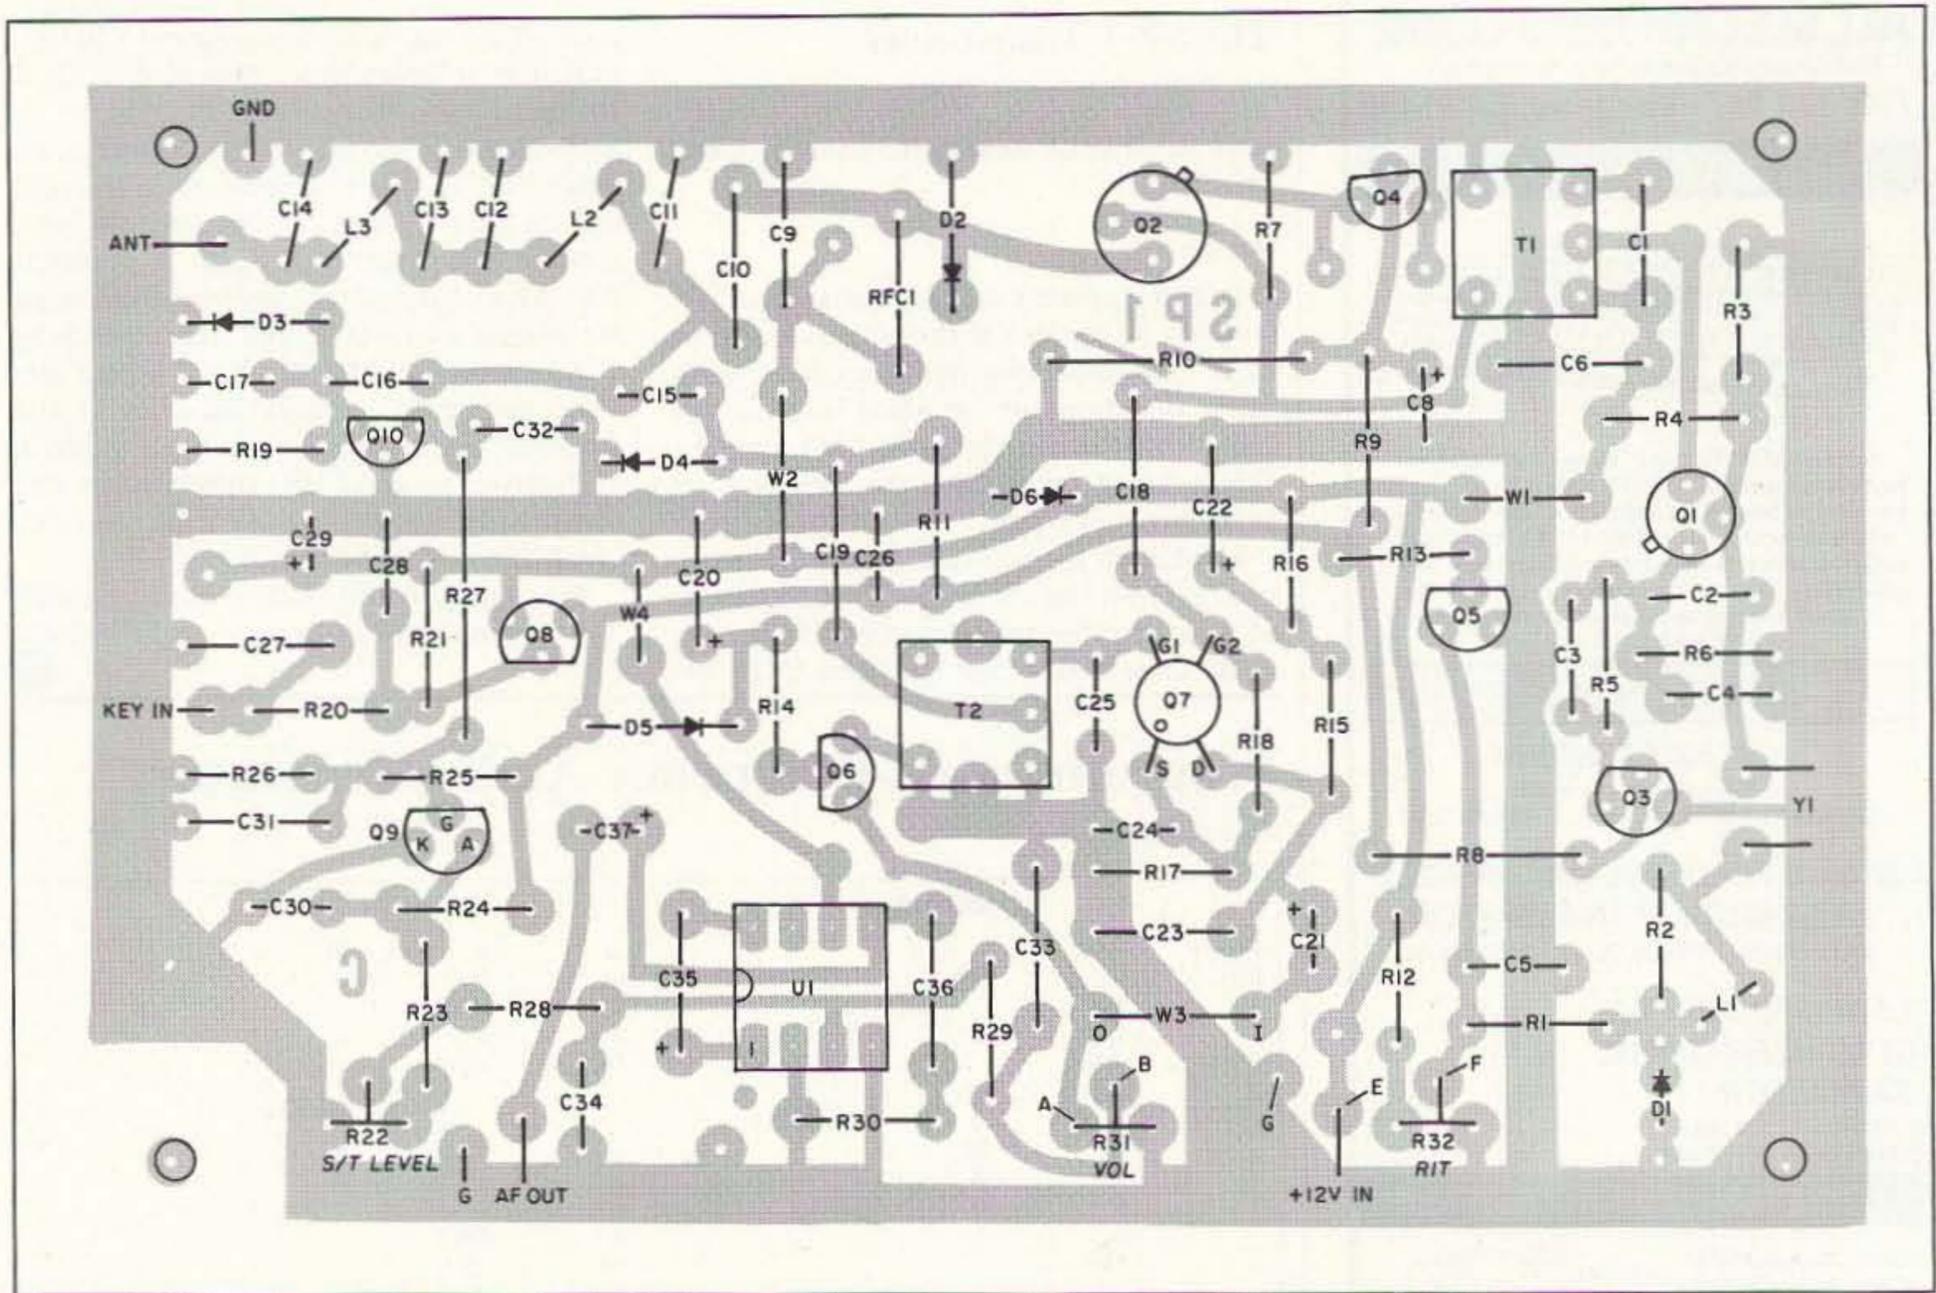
PC board parts placement. To disable the transmitter, remove wire jumper W2. Also remove R27 to lower sidetone pitch to normal with transmitter disabled.
